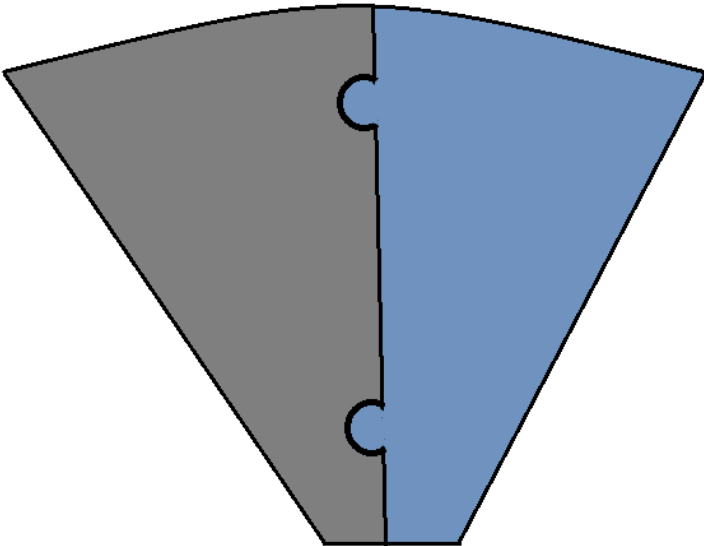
TOP VIEW OF TWO PANELS USING CUP AND CONE DESIGN
